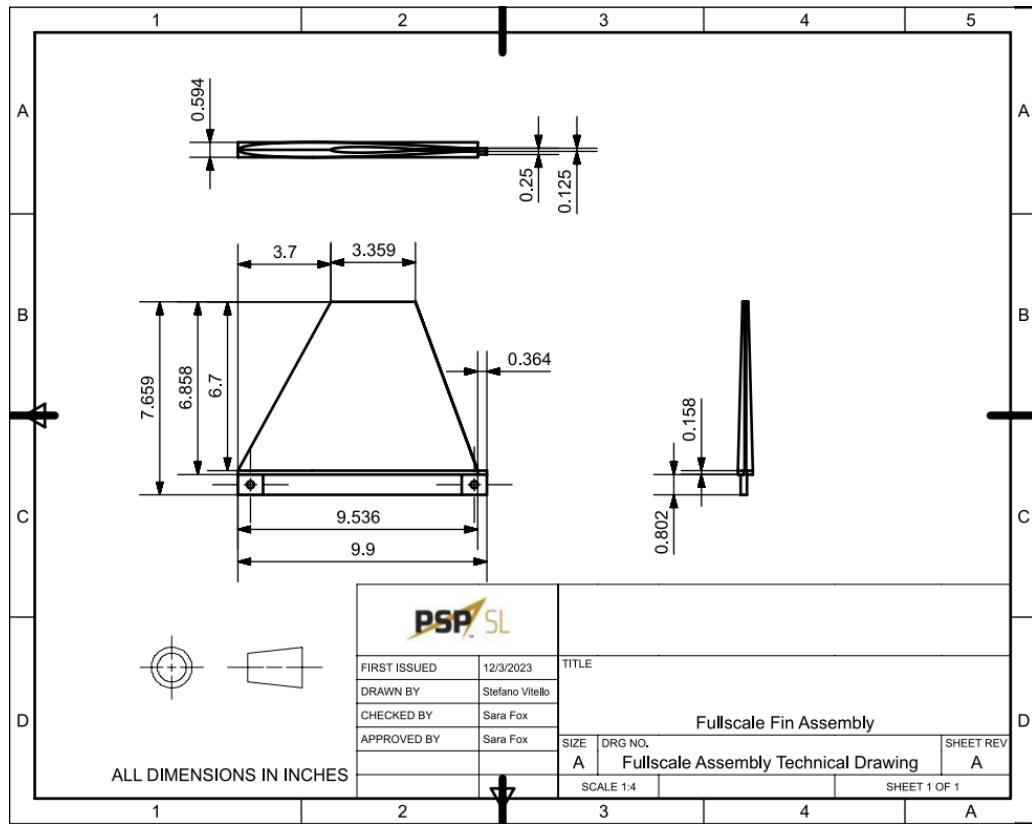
Technical Drawing for Full Scale Fin and Fin Insert
